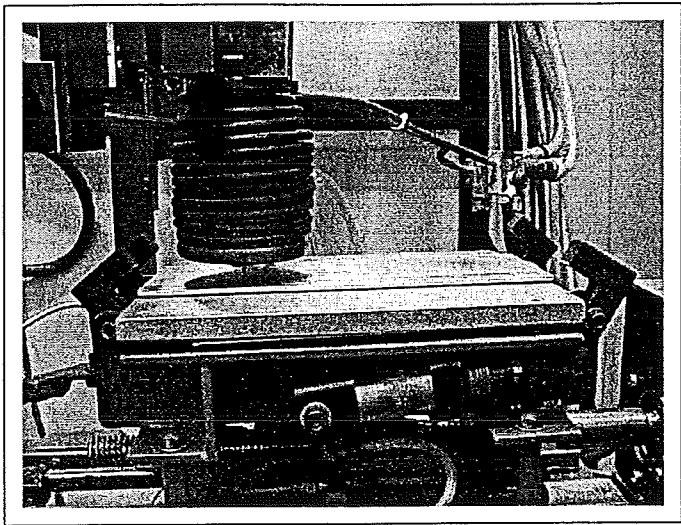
Basic part of the experimental set-up for straight bead on plate welding with electro-magnetic coil attached to the welding torch.
